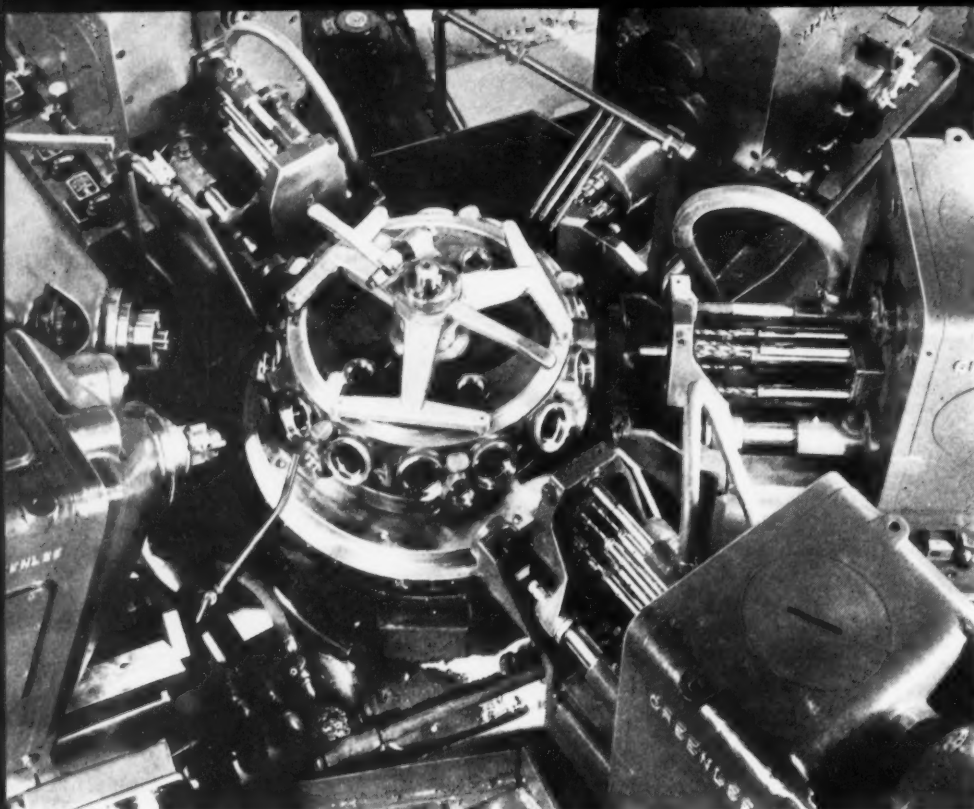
shows tooling equipment for Greenlee machines designed for rough- and finish-boring,
